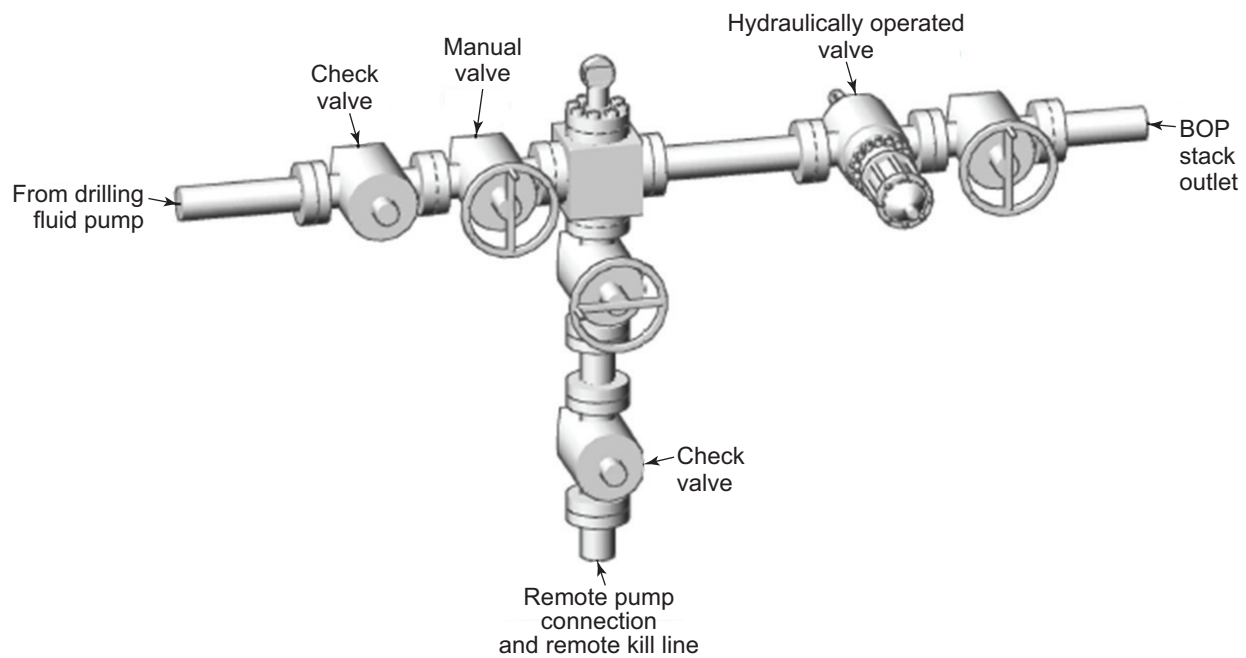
Example Kill Line Assembly for 10K and Greater Rated Working Pressure Service—Surface BOP Installations
